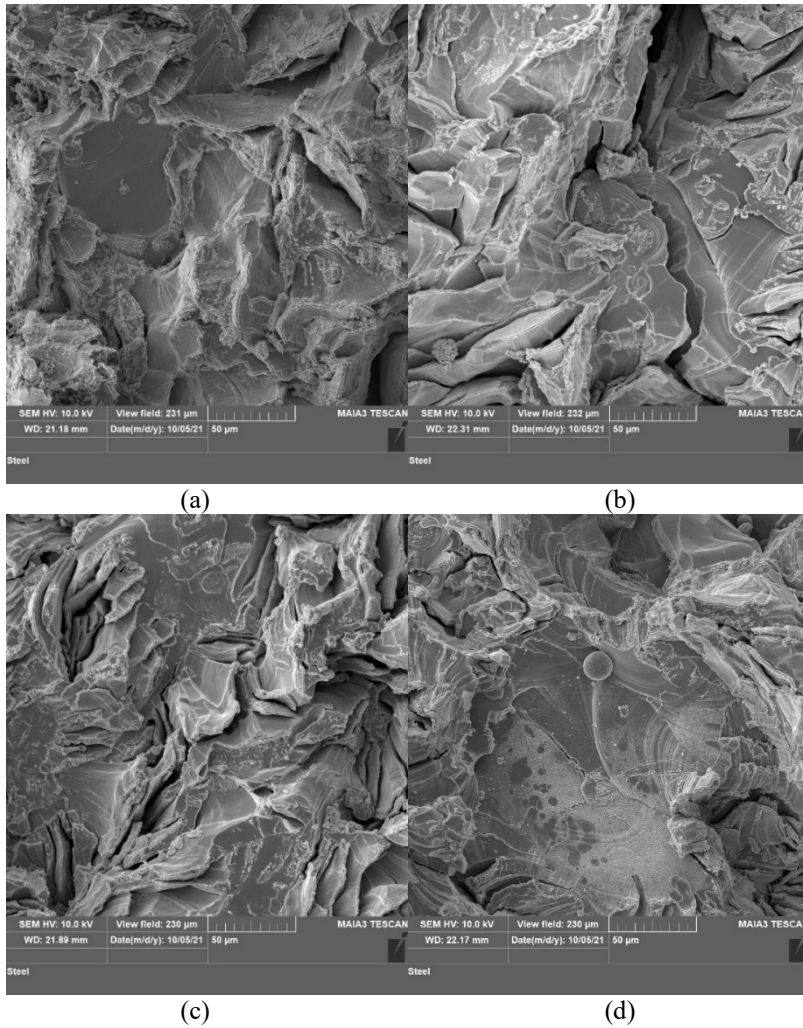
Fracture Surfaces of Samples Processed in 5% H_2 at 100 mm/s (a), 200 mm/s (b), 400 mm/s (c), and 600 mm/s (d), Subjected to Three-Point Bend Testing at 600 °C at 1.2kx Magnification
